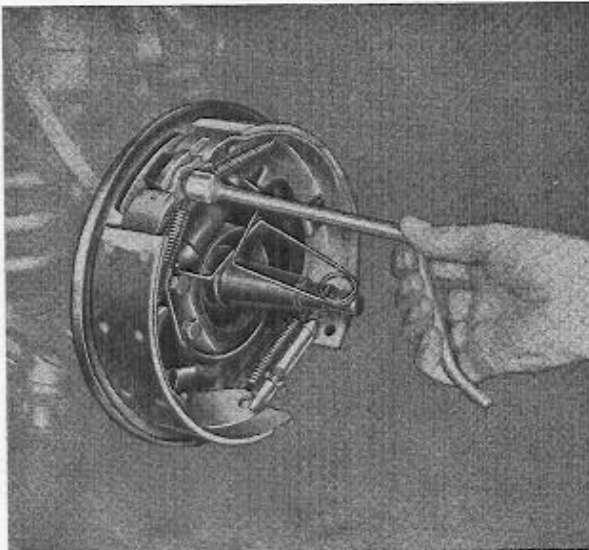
Removing the return spring with brake spring tool (Snap-on BT 11 or corresponding).
